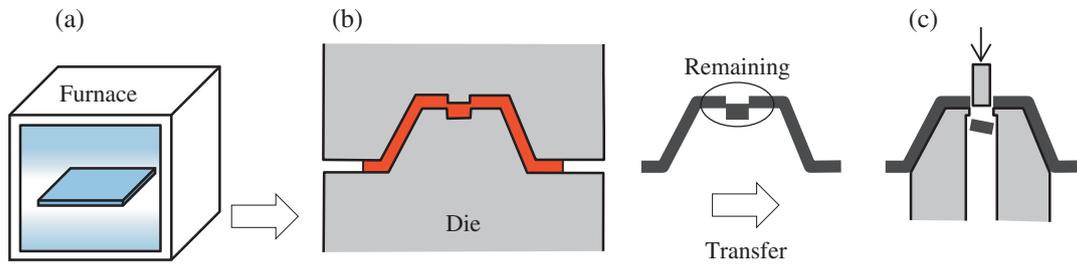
Hot semi-punching and cold scrap removing in hot stamping of ultra-high strength steel part. (a) Heating, (b) hot semi-punching in hot stamping and (c) cold scrap removing.
